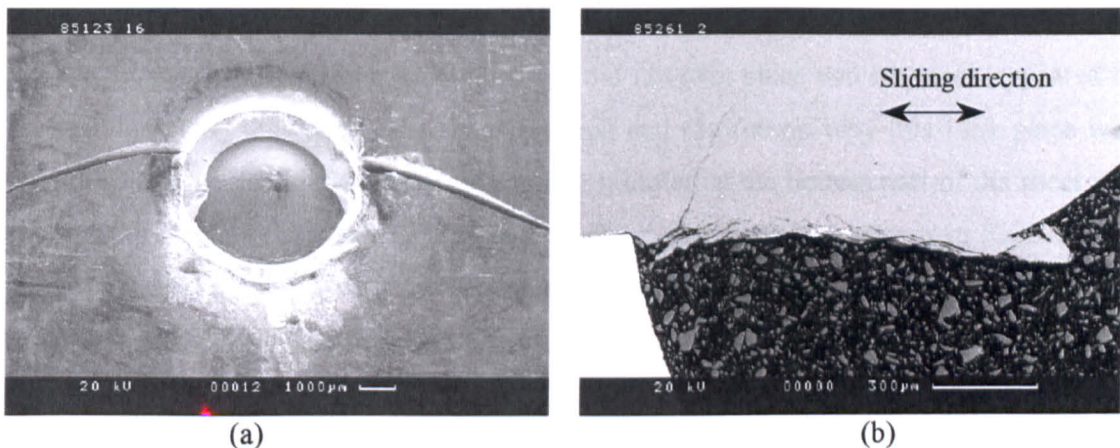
(a) the locked sheet after 489,300 cycles at a peak load of 3.6kN with a part of broken rivet; (b) small cracks that initiated at the surface of the locked sheet in contact with the rivet shank
